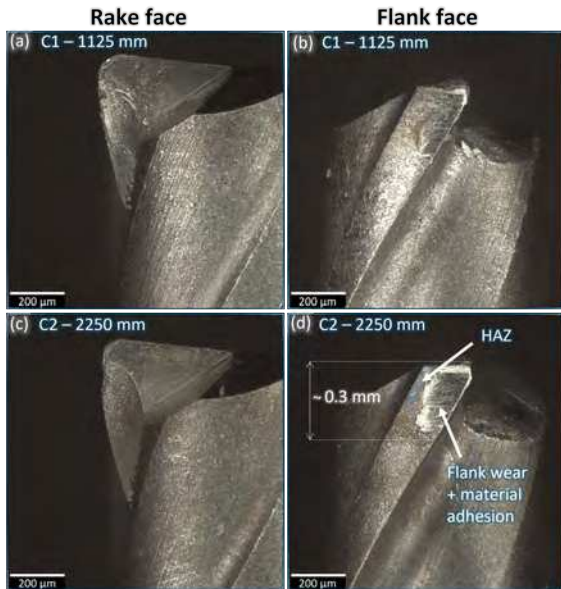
Rake and flank face of the coated tools in different stages of machined length.
